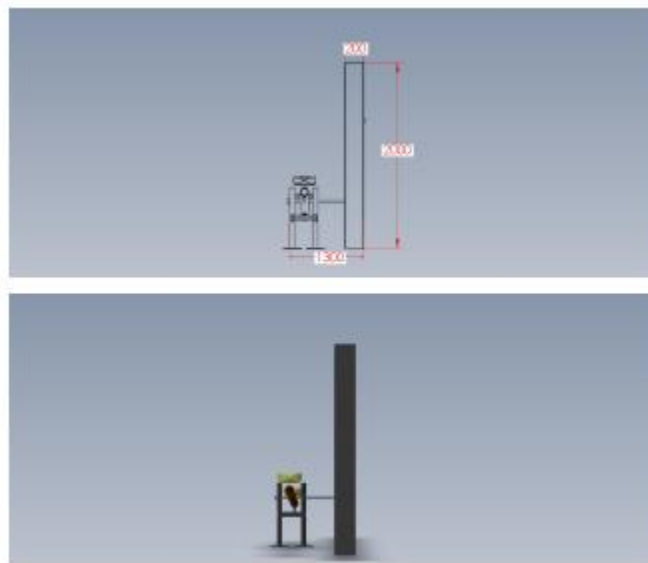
Side View of Seesaw with Gear Wheels (All dimensions are in mm.)
